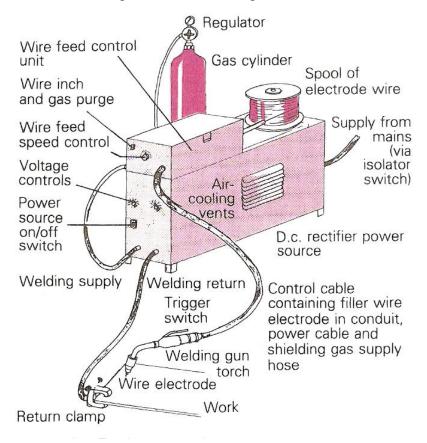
Basic Set-Up for MAGS Welding
